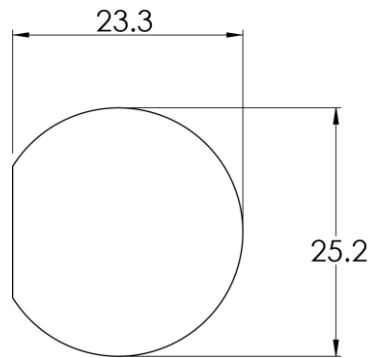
Remote Pendant Patch Board Mounting Hole Dimensions (mm)
